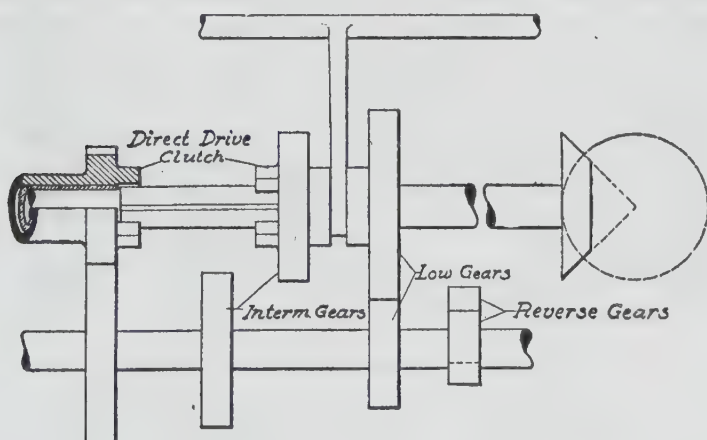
SLIDING GEAR WITH DIRECT DRIVE.
